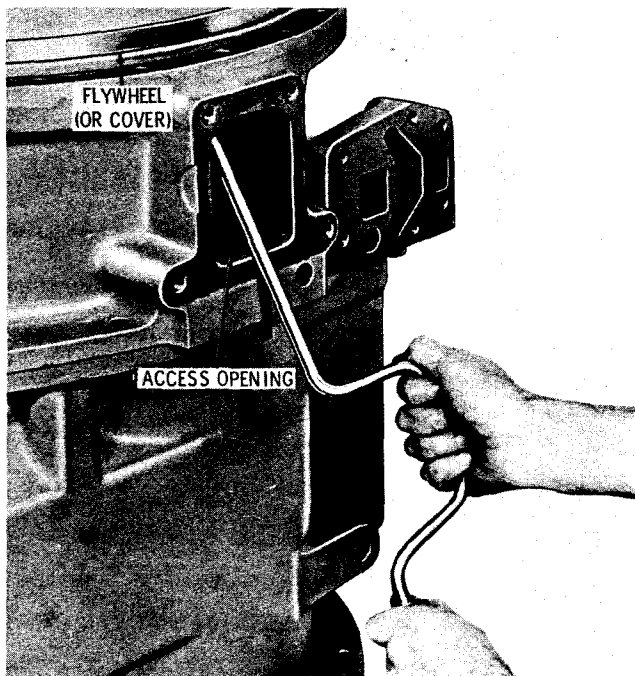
Installing bolts which retain flywheel (or converter drive cover)
